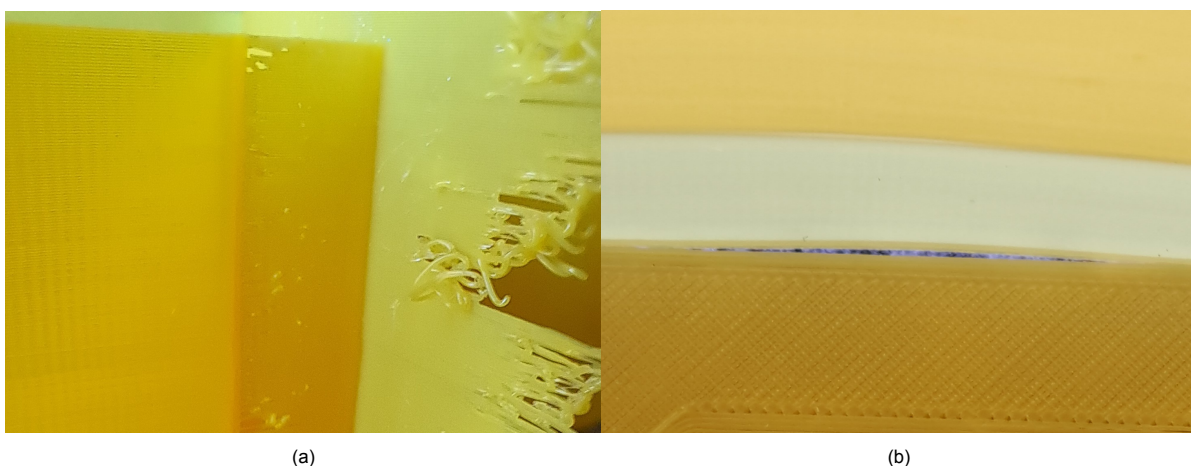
Common issues in areas of single-perimeter thickness: Subfigure (a) shows missing material near stiffeners (left) and poor printing of overhanging single-perimeter walls (right) and Subfigure (b) shows separation of side wall from bulkhead due to plate buckling.
